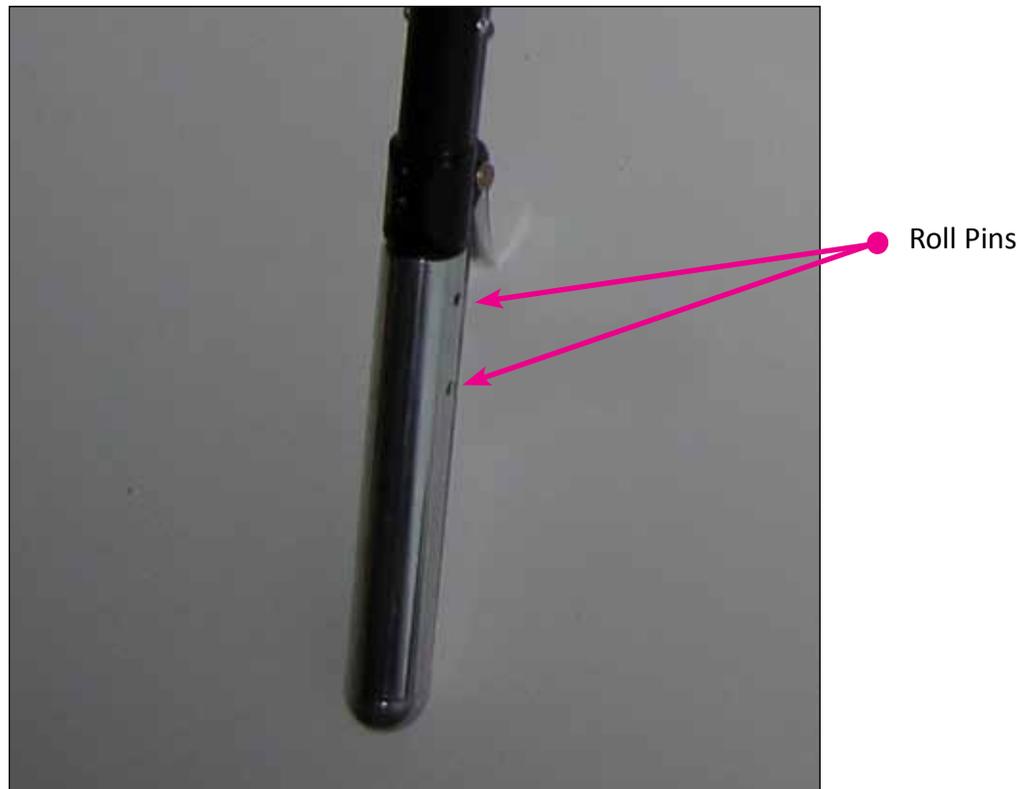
SECTION 2Step 11. HANDLE ASSEMBLY
